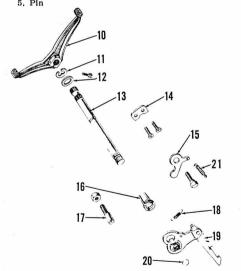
Exploded view of gear shift linkage. Lever (19) turns selector drum (3—Fig. K1-15) by catching pins (2).
